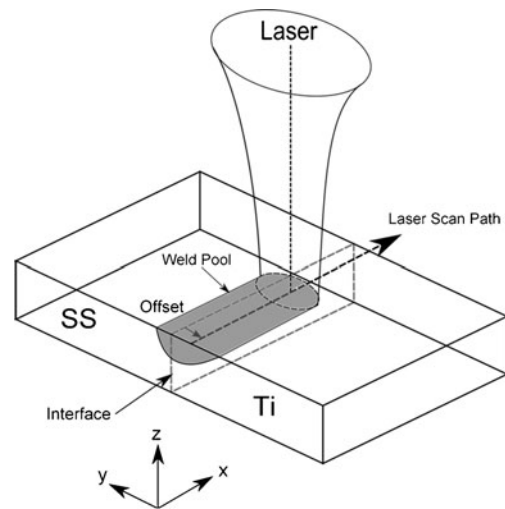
Schematic diagram of welding geometry. Note offset of laser beam from interface toward Ti sample
